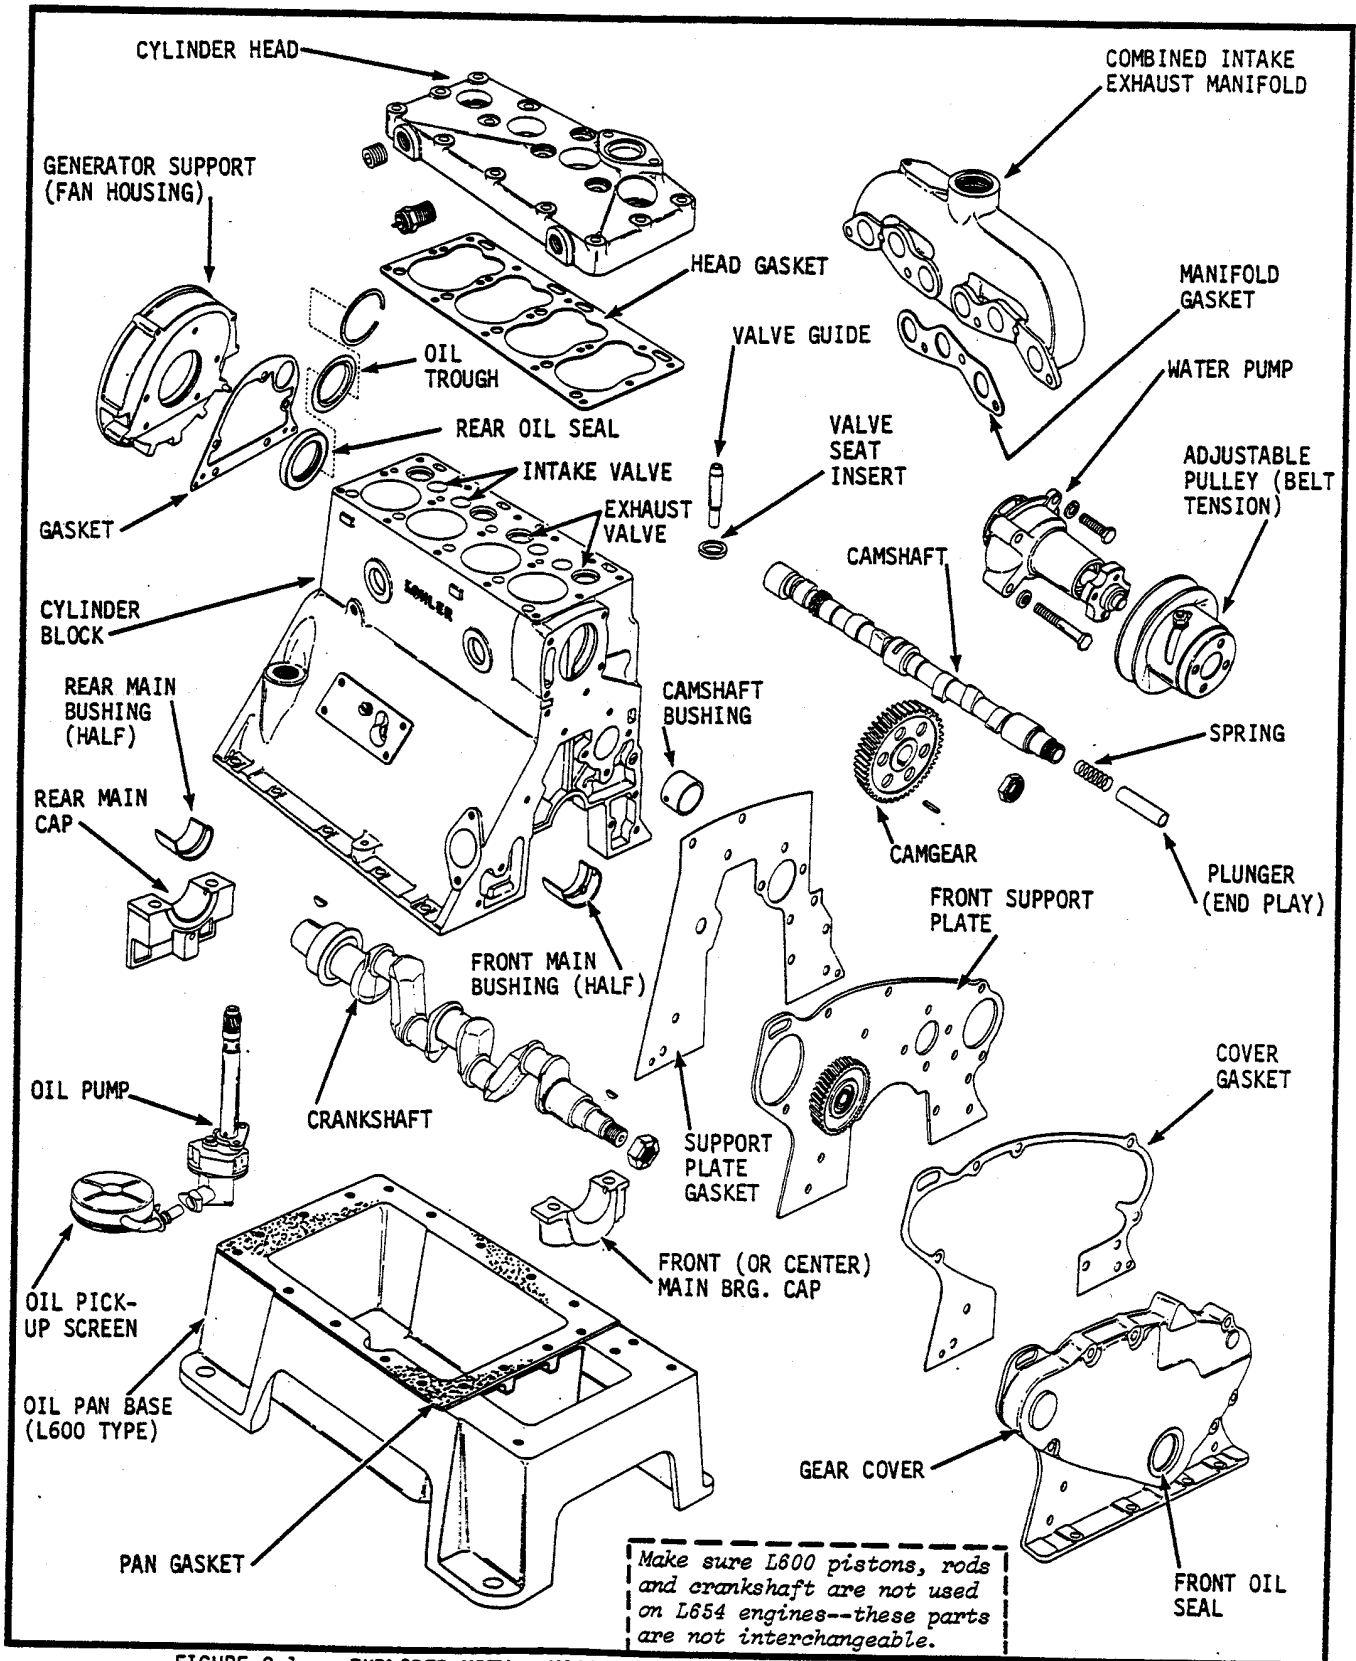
EXPLODED VIEW - MAJOR COMPONENTS OF A TYPICAL ENGINE
